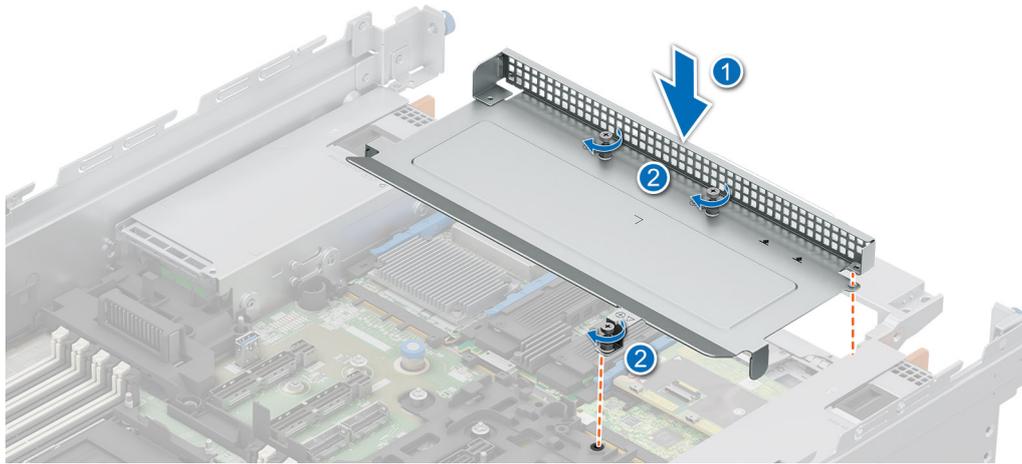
Installing the rear expansion card riser 4 and riser 2 blank
